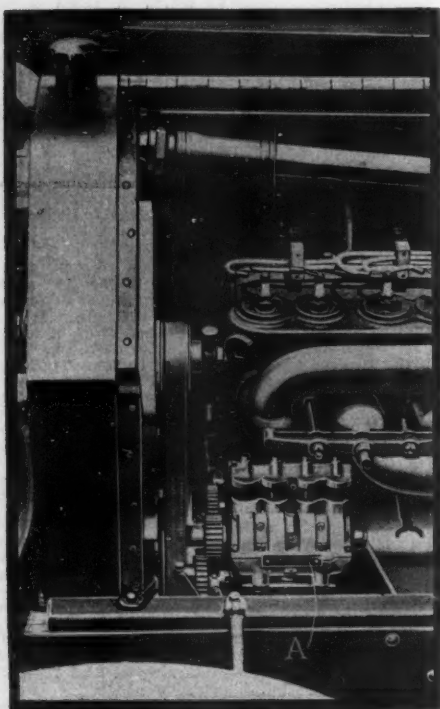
The Four-Cylinder Power Air Pump A, Mounted on an Aluminum Bracket and Gear Driven From the Camshaft.
